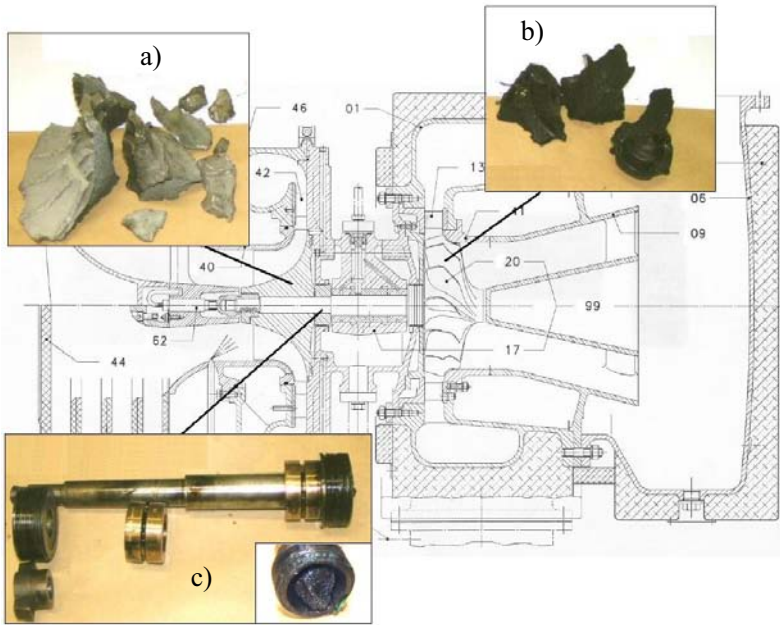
Rest of the turbocharger working elements after the failure: a) – compressor rotor, b) – turbine rotor, c) – propeller shaft, bearings, and labyrinth sealing
